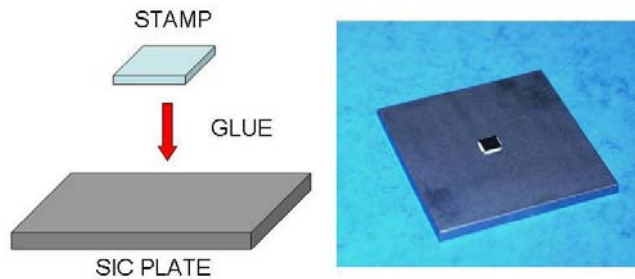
Schematic showing attachment of a stamp on a support tool by glueing (left) and a photograph of the SiC tool with a stamp glued on the top (right).
